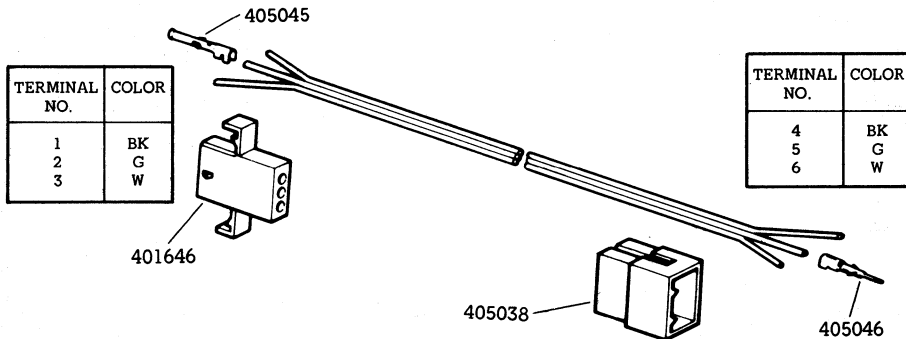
405049 AC Input Cable Assembly – Printer Under Monitor Cabinet
